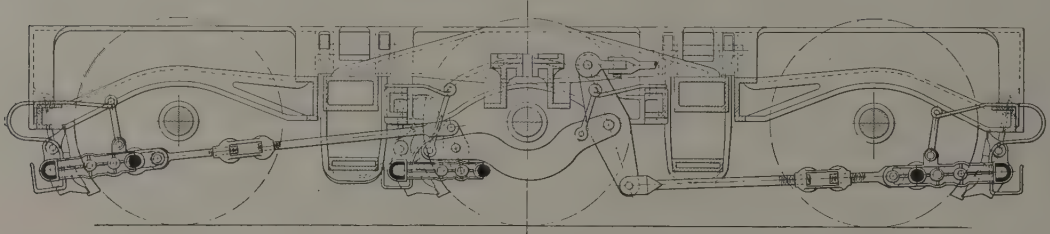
Standard Triple Arrangement of Brake Rigging for All-Steel Six-Wheel Passenger Car Trucks.
